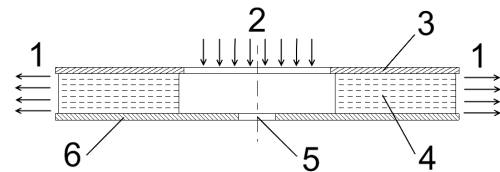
Impeller design with assembly parts [3]: (1) radial direction of fluid velocity at the exit, (2) axial direction of fluid at the entrance, (3) impeller upper wall, (4) open cell porous material, (5) axis of rotation, (6) impeller lower wall
